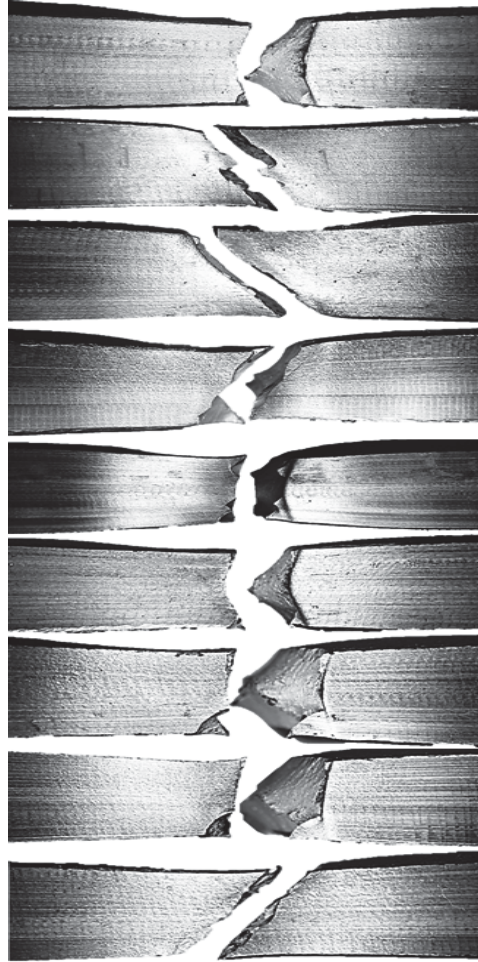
Macro tension testing - fracture surfaces for tube T1 to T9.
